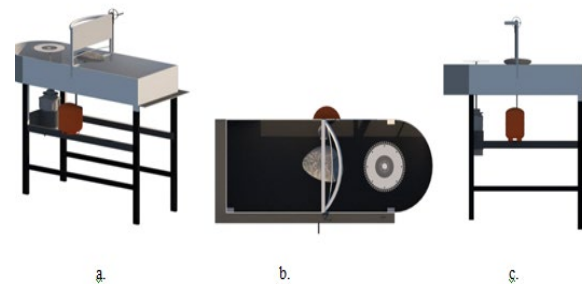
Machine Design, a. 3-D Diagram of Machine, b. Plan View of Machine, c. Side view of Machine
